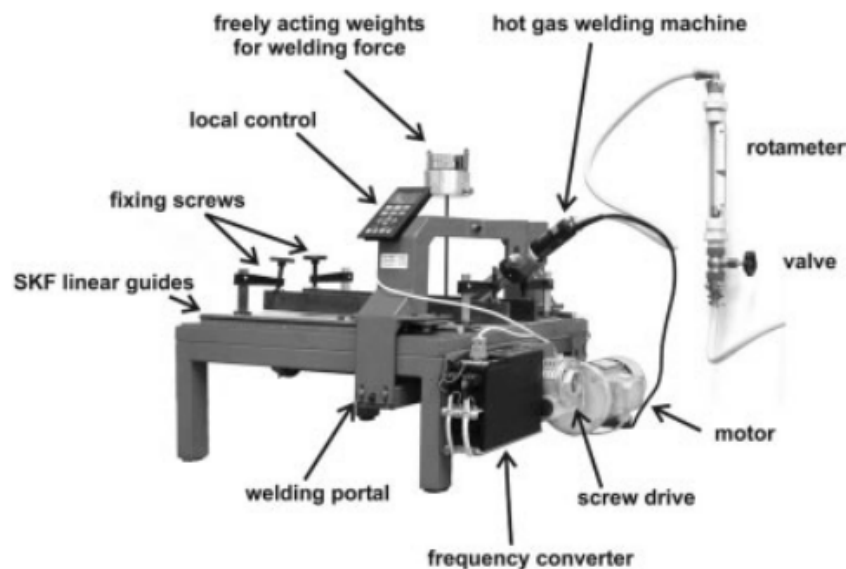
Automated hot gas welding with a filler rod. Taken from (Marczys, 2006).
